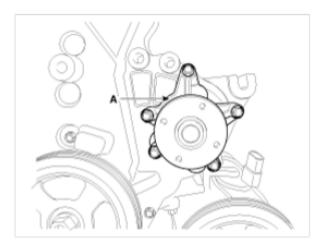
Identifying Water Pump Pulley And Drive Belt Idler Courtesy of HYUNDAI MOTOR AMERICA
